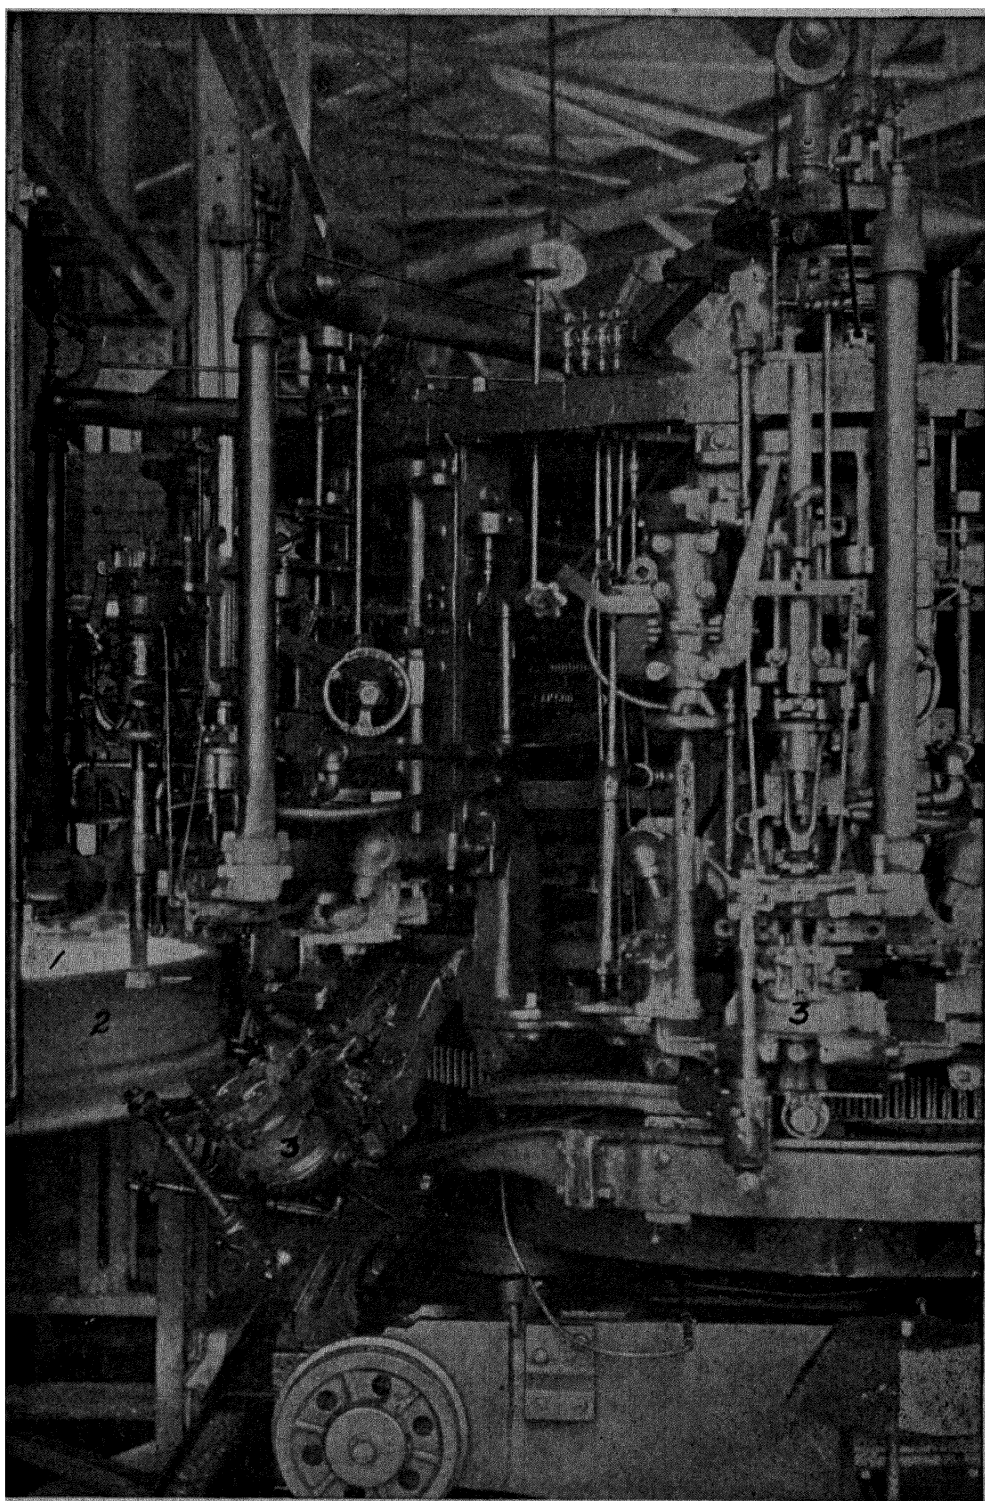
III.—Owens automatic bottle machine. (1) Melted glass. (2) Revolving pot. (3) Bottle mold.
